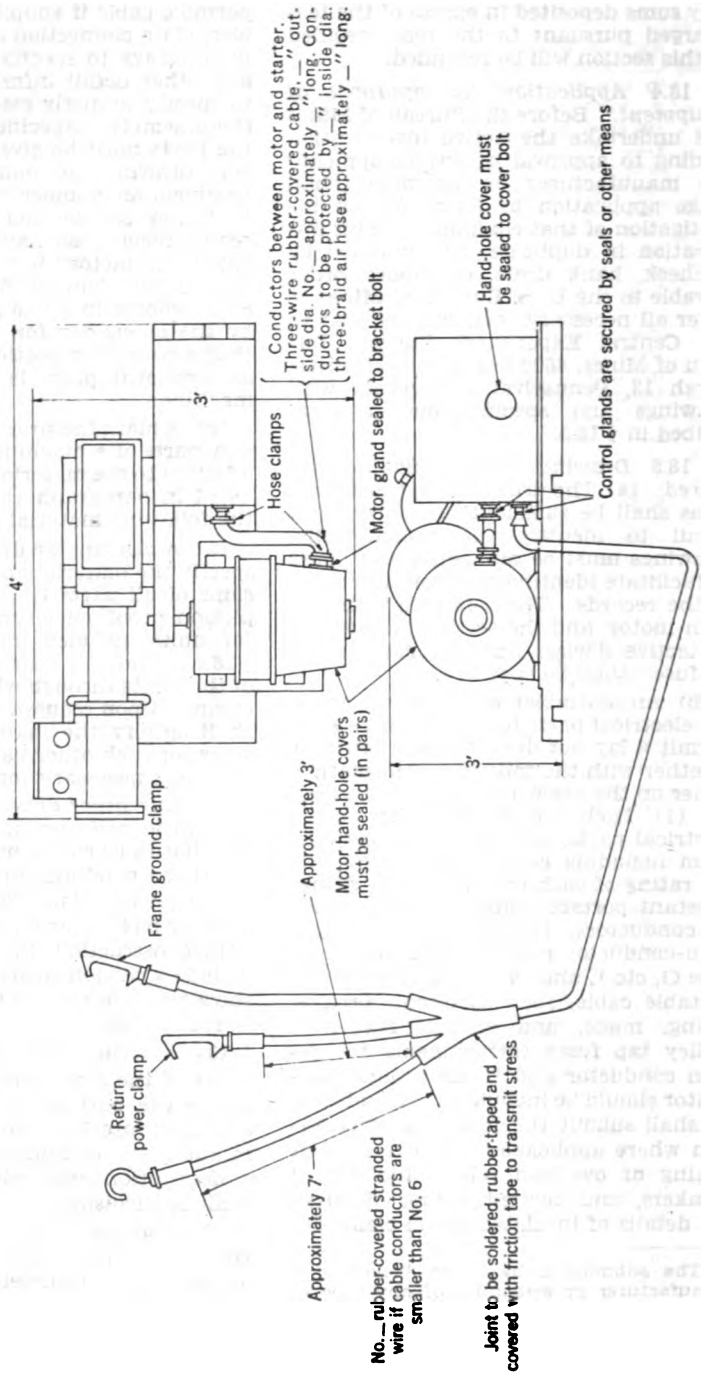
Layout drawing for ----- Manufacturing Co.
